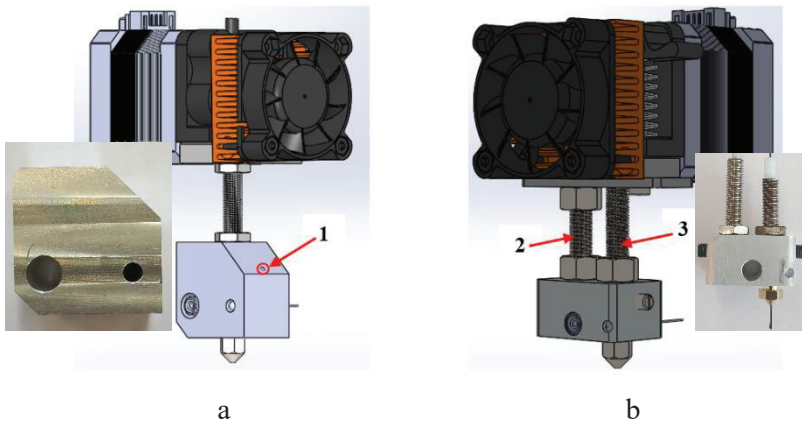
Prototypes of printing heads: a – early prototype; b – improved prototype; 1 and 3 – CCF inlet; 2 – matrix inlet
